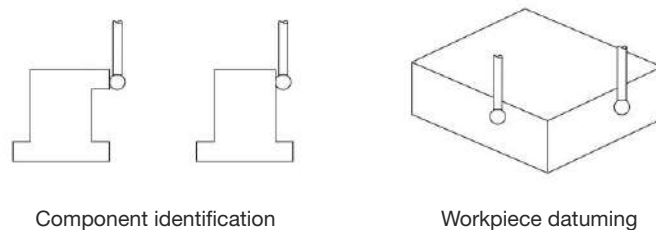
Probing examples for workpiece set-up on the machine-tool table
